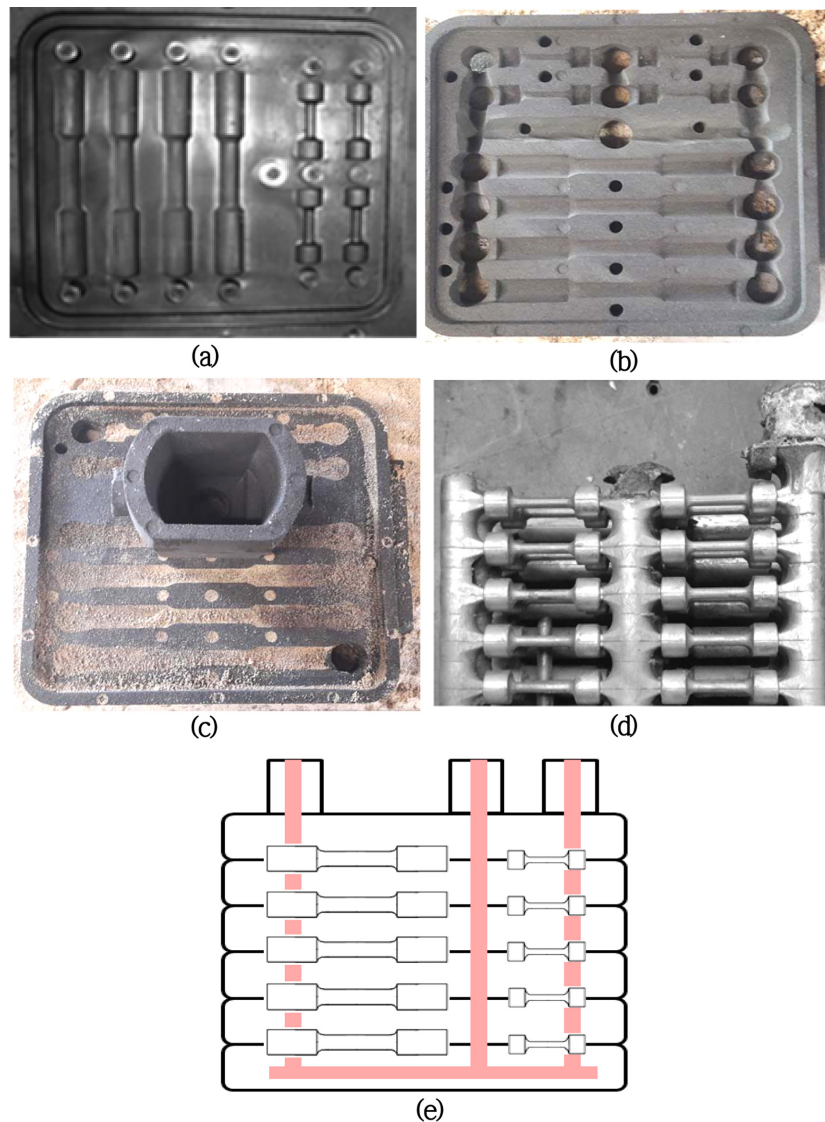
Die to produce shell plate for stack mold, (a), upper planes of bottom, (b), and top plates, (c) and test casting obtained after shake out, (d), stack mould figure, (e).
